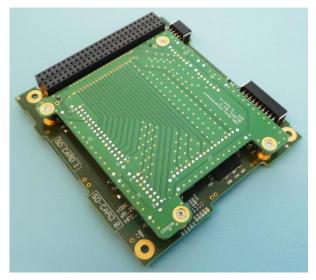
FM daughterboard assembly (with iOBC, top view).
